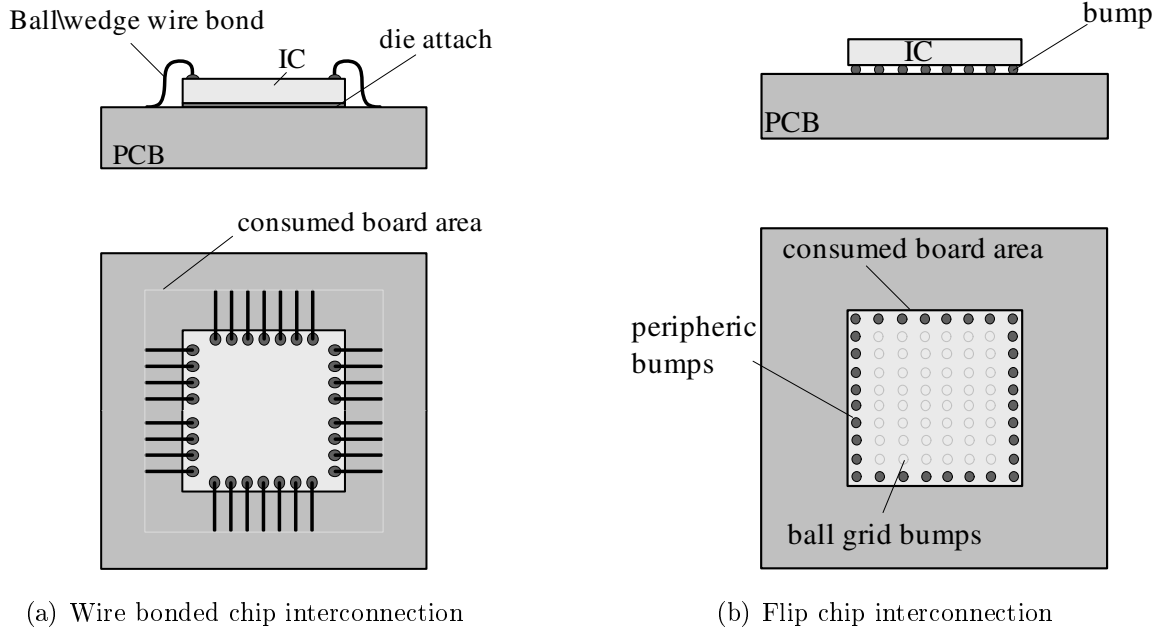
Overview of the chip scale packages (CSP) wire bonding and flip chip technology; (a): Chip placement on the board using die attach material (solder, adhesives) to establish mechanical and thermal connection; wire bonds using ball/wedge bonding for electrical interconnection; (b): balls made of solder, by gold stud bumping or electroless procedures are used to give mechanical, electrical and thermal connection between IC and substrate; the wire bond assembly consumes board area of the size of the die plus the wire bond loops, whereas the flip chip interconnection does not need more area than the chip itself; comparing the number of I/Os, the flip chip technology is capable of having bumps not only located peripherally along the chip edges but distributed over the whole chip [43, 81, 112, 114]
